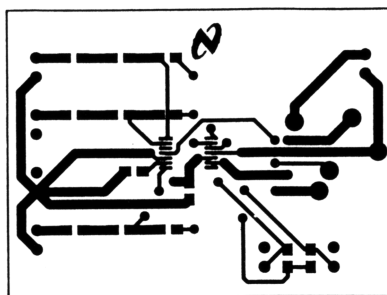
Recommended MT PC Board Layout: Component-Side Layout
